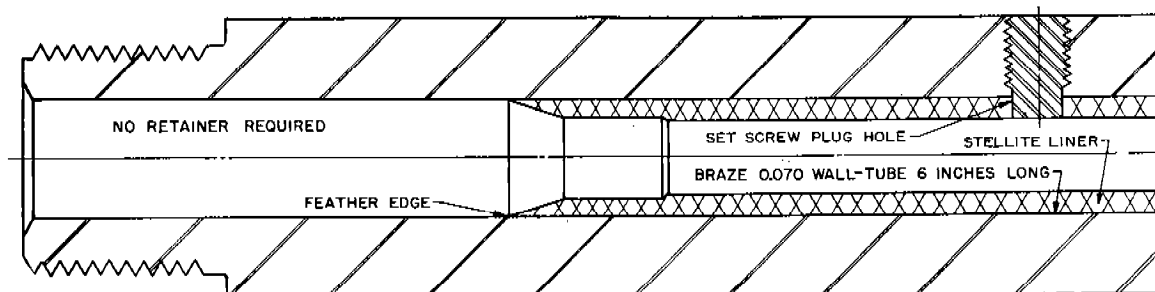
Caliber .30 Browning machine gun barrel assembly with flangeless liner; Johnson design. (This figure has appeared as Figure 2 in NDRC Report No. A-455.)
